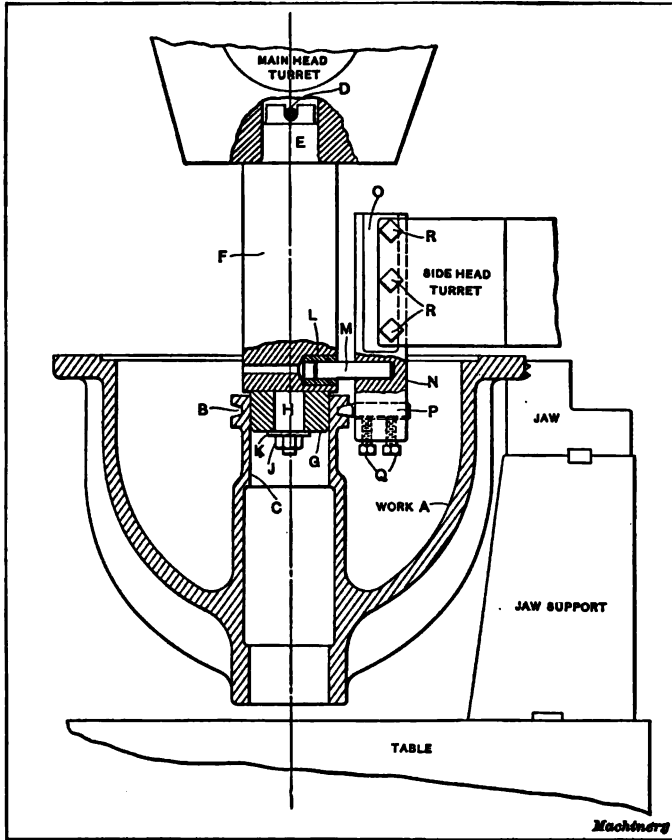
An Arrangement for cutting a Groove on the Outside of a Sleeve
